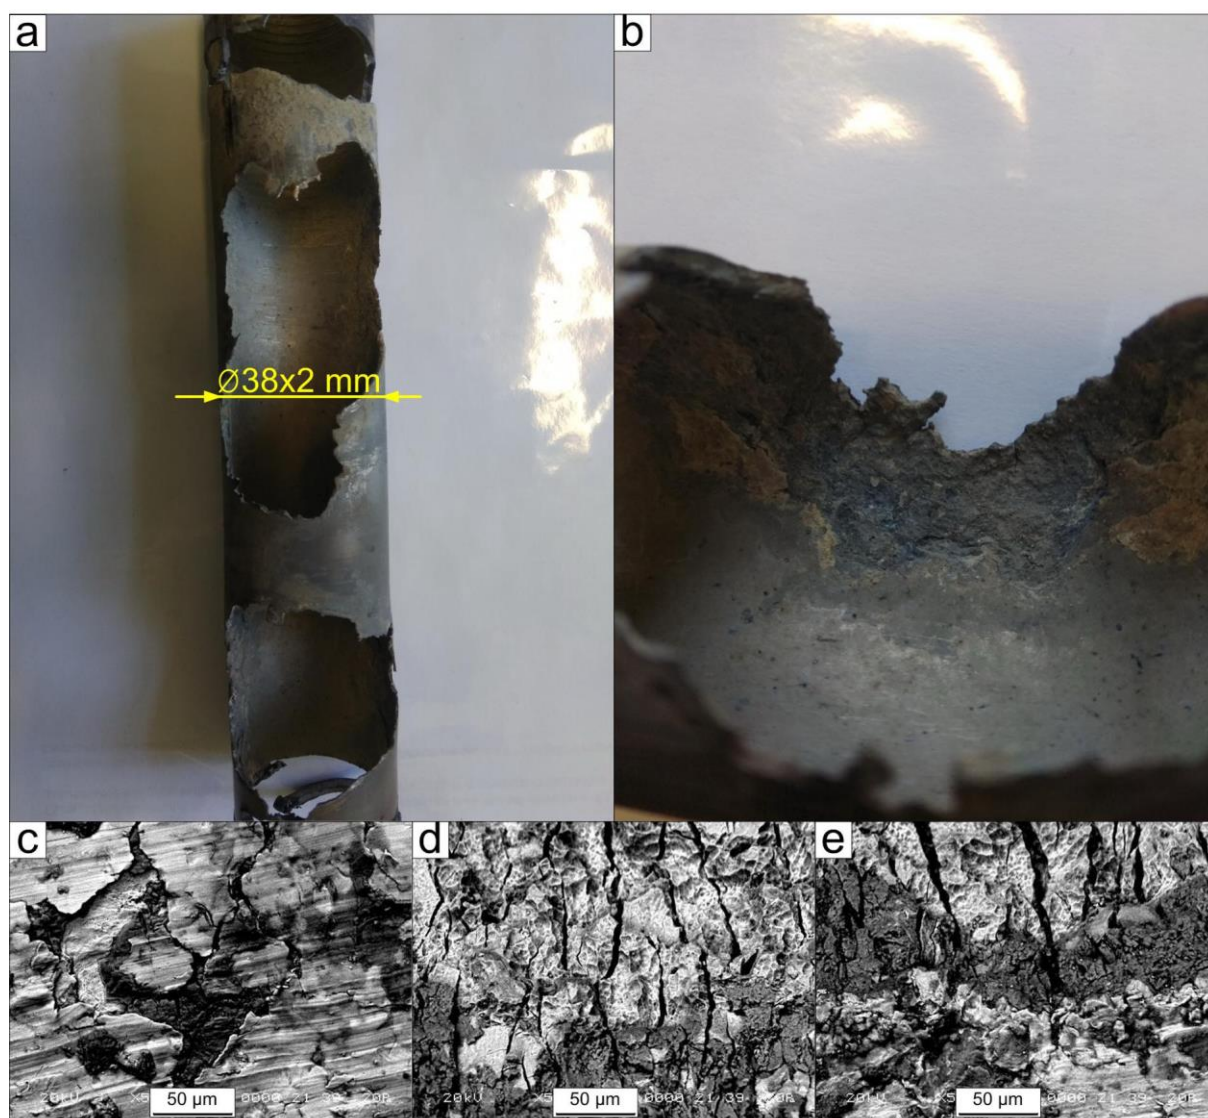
Photographs (upper row) and SEM images (lower row) showing millimeter and micrometer-sized cracks and visible corrosion and failure
